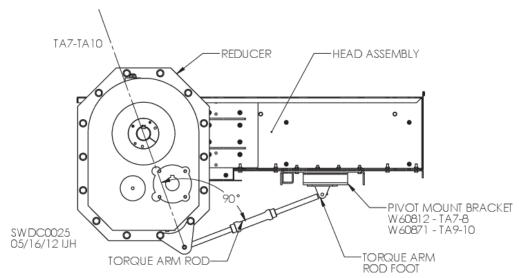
Torque arm rod attachment for TA7-TA10 reducers
